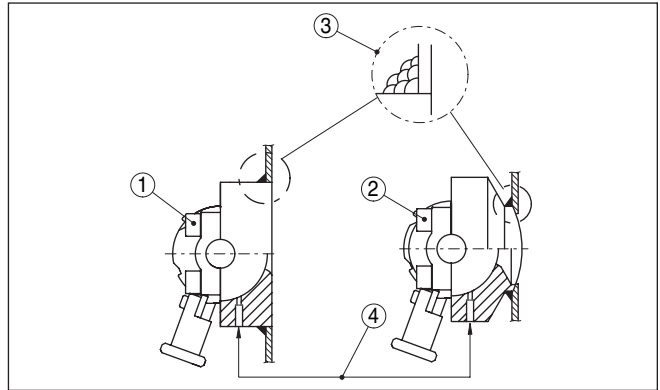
Ball valve fitting PASVE in welded version
